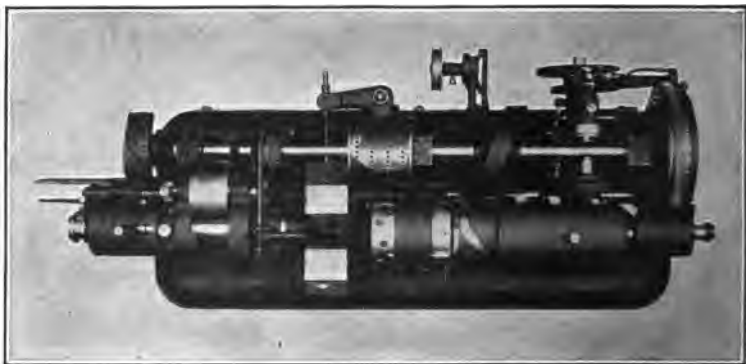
TOP VIEW OF A CLEVELAND AUTOMATIC LATHE
